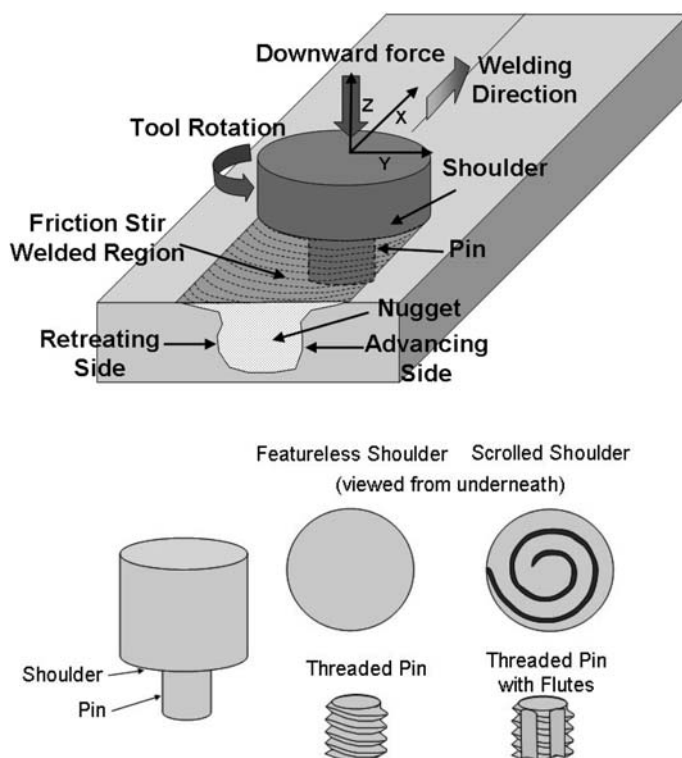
Schematic drawing of friction stir welding process and friction stir welding tools.
